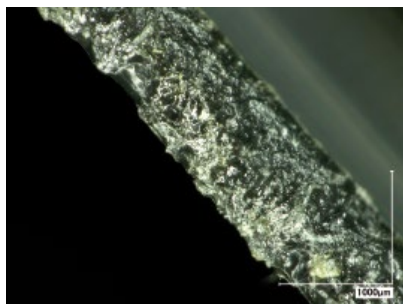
Roughness of the cut edge when laser cutting PC with the use of dry ice.
